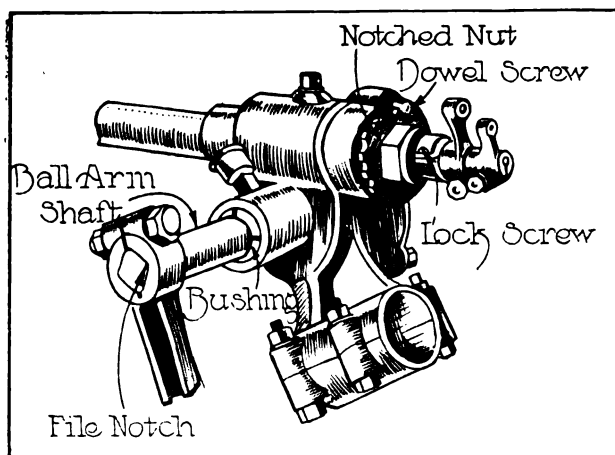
Showing Parts Employed in Eliminating Back Lash of Steering Gear and Lost Motion.
